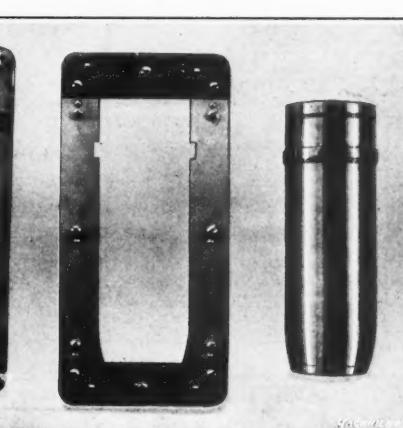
A Built-up Type of Profile Gage for Russian Shrapnel Shells
